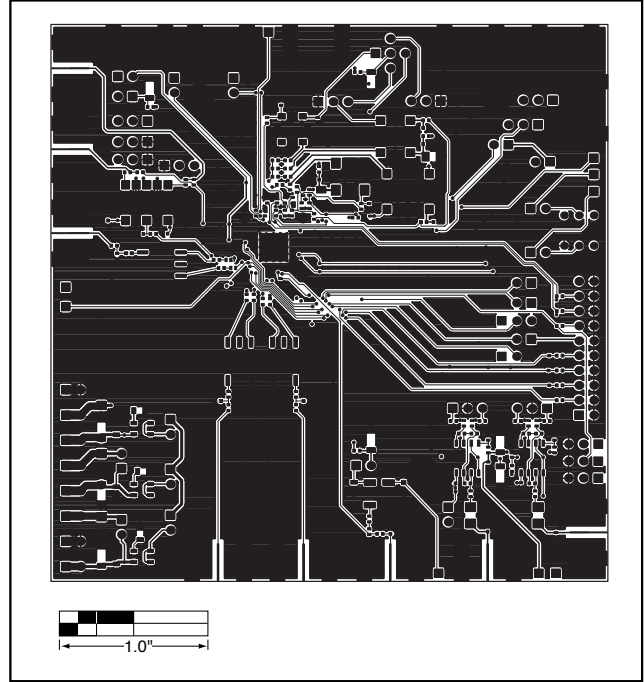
MAX256\_/MAX257\_ EV Kit PC Board Layout—Solder Side
